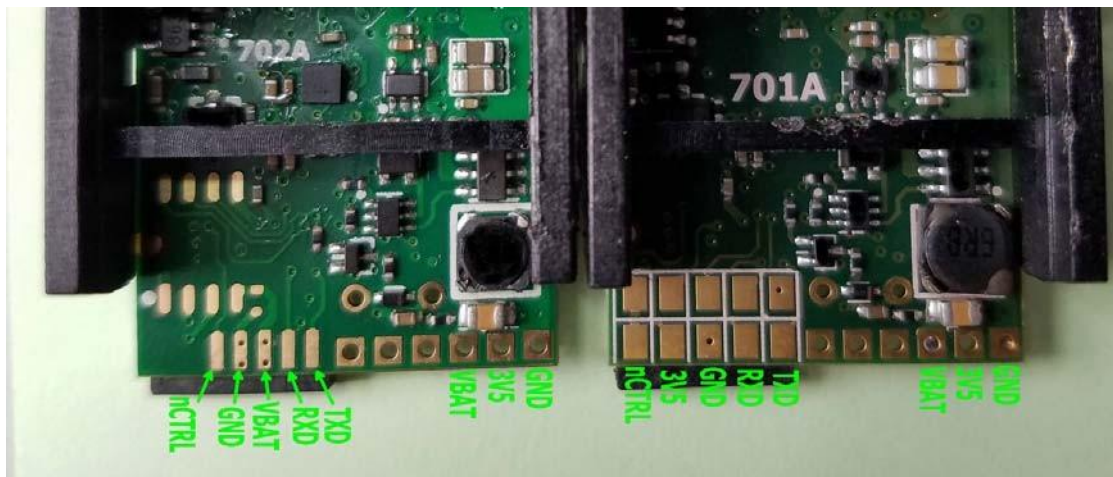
Module 701A&702A Bottom Side Pin Assignment
